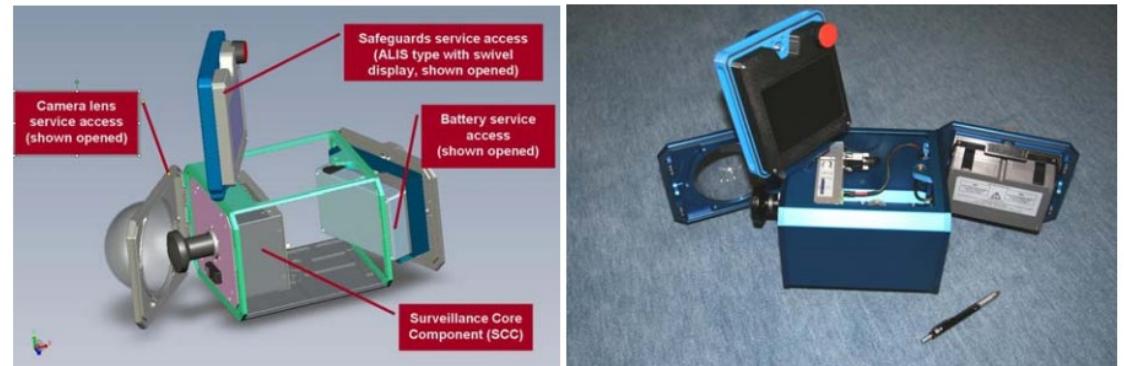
NGSS: exploded view and existing prototype (courtesy of IAEA)
